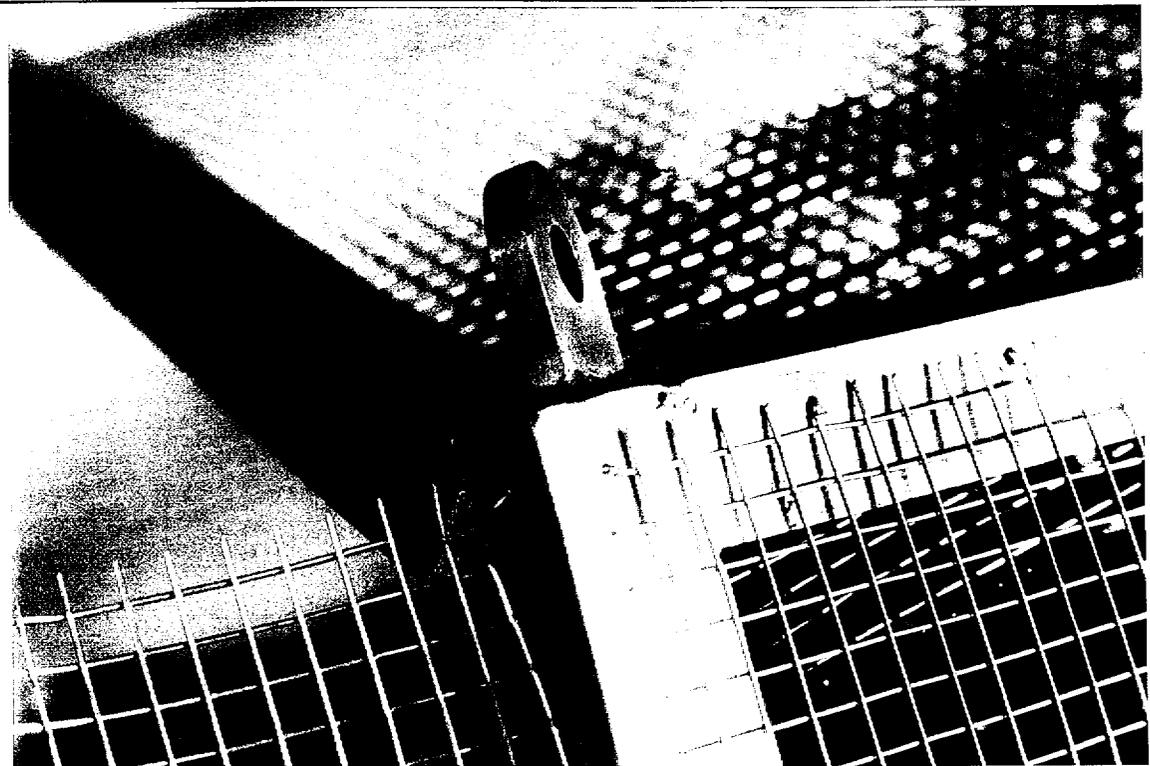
Split near cage weld and lifting point showing bruise
